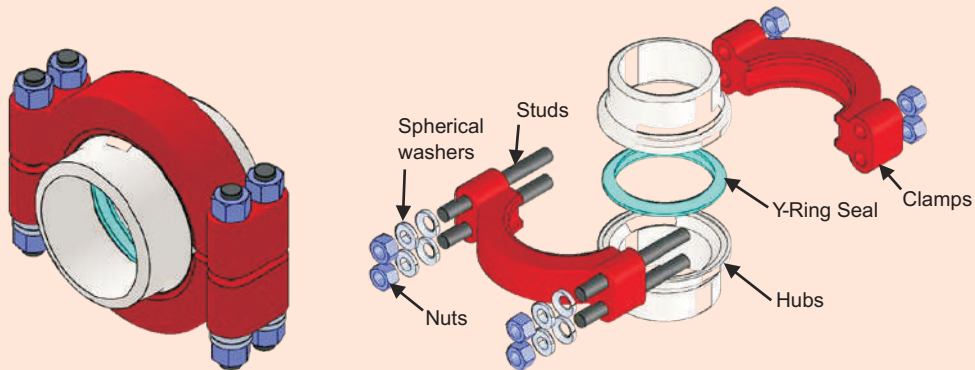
(a) Fully assembled RedLok™ connector (b) Exploded view of RedLok™ connector
